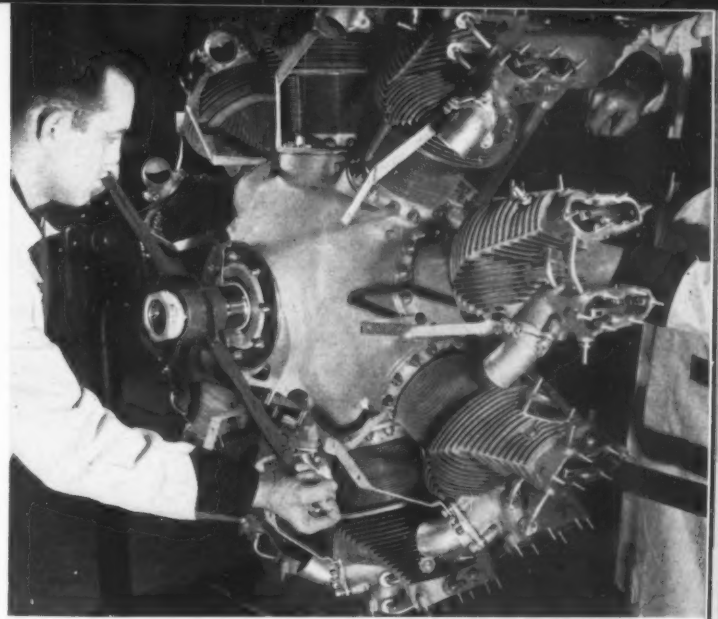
Buda-Guiberson radial diesel engine used in army tanks has roller bearing equipped rocker arms. Fig. 6 indicates a method of assembly
